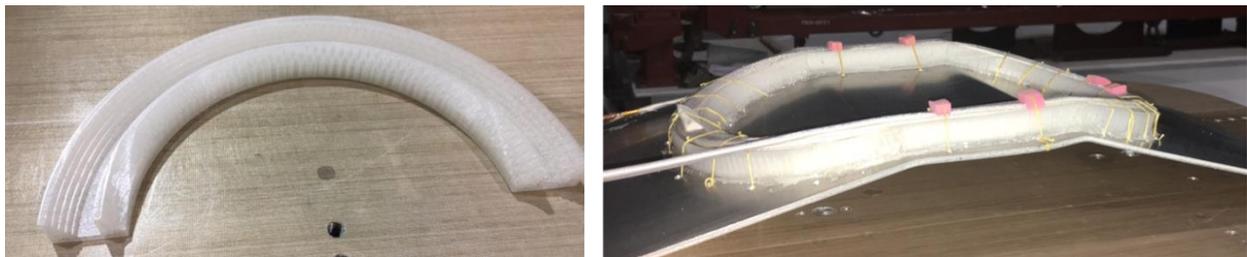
Printed coil part made with the PBL 3-d printer (left) and the coil wound (right) using these printed parts and Nb<sub>3</sub>Sn cable obtained from LBNL.
